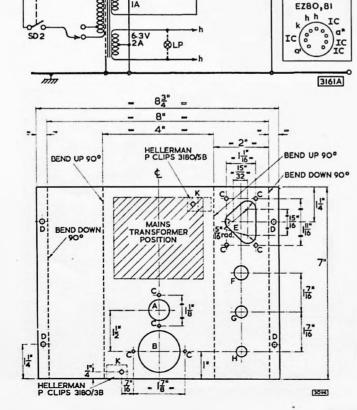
CHASSIS DRAWINGS AND KEY TO HOLES
